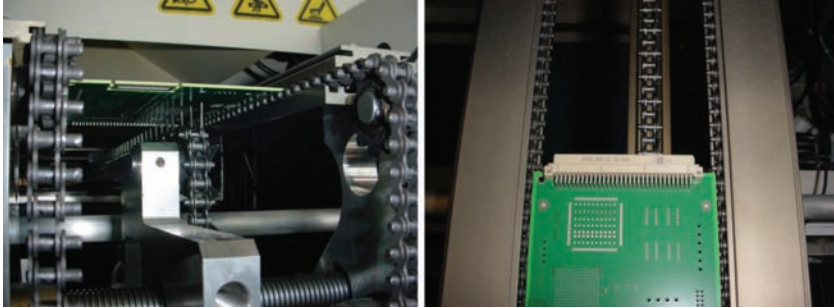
It is possible to still use centre board support on boards that are correctly designed or on thin multi-panels to provide support. The images show a board being supported with pin support on a BTU chain mechanism. Care should be taken in positioning the assembly to avoid contact with components on the base of the board or with the pins on through-hole connectors.
